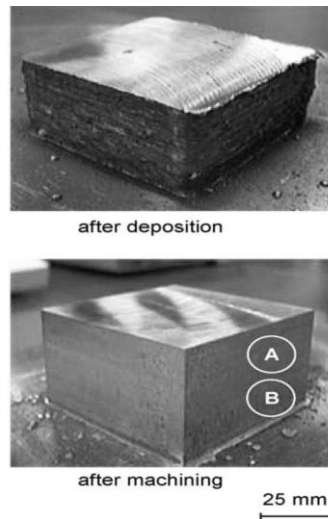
Solid part before and after machining by Song, *et al.* [33]
